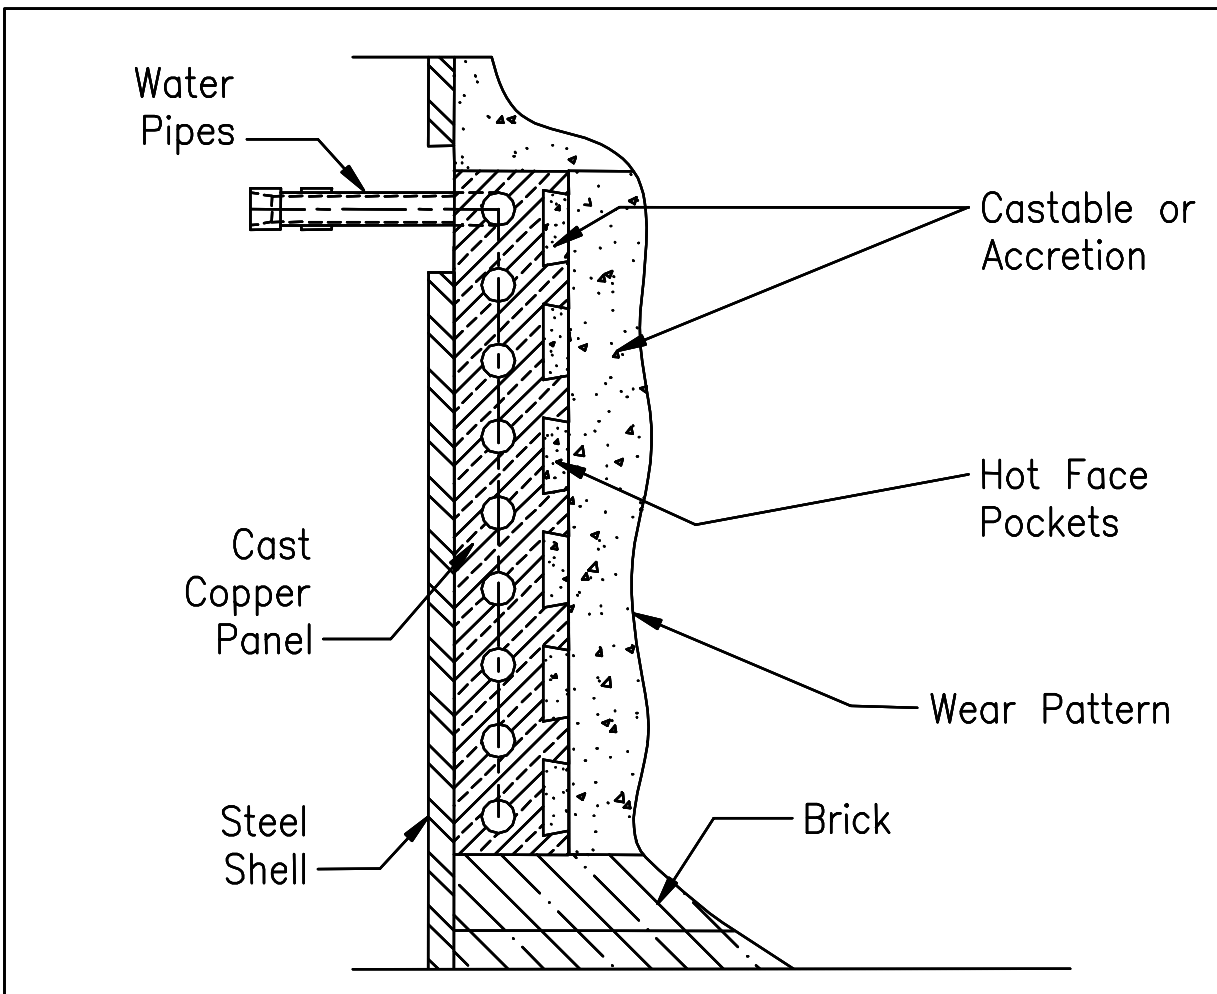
Furnace Arrangement for Cast Copper Cooler.
